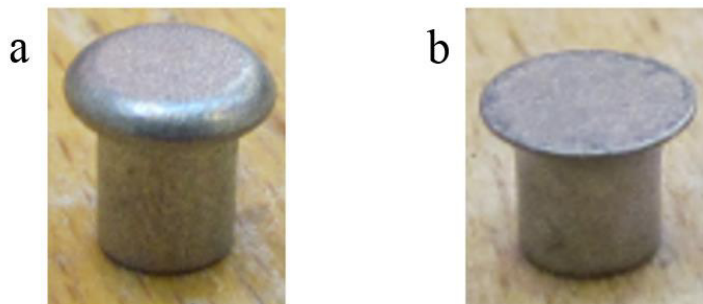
(a) Domed head self-piercing rivet; (b) Countersunk head self-piercing rivet.
